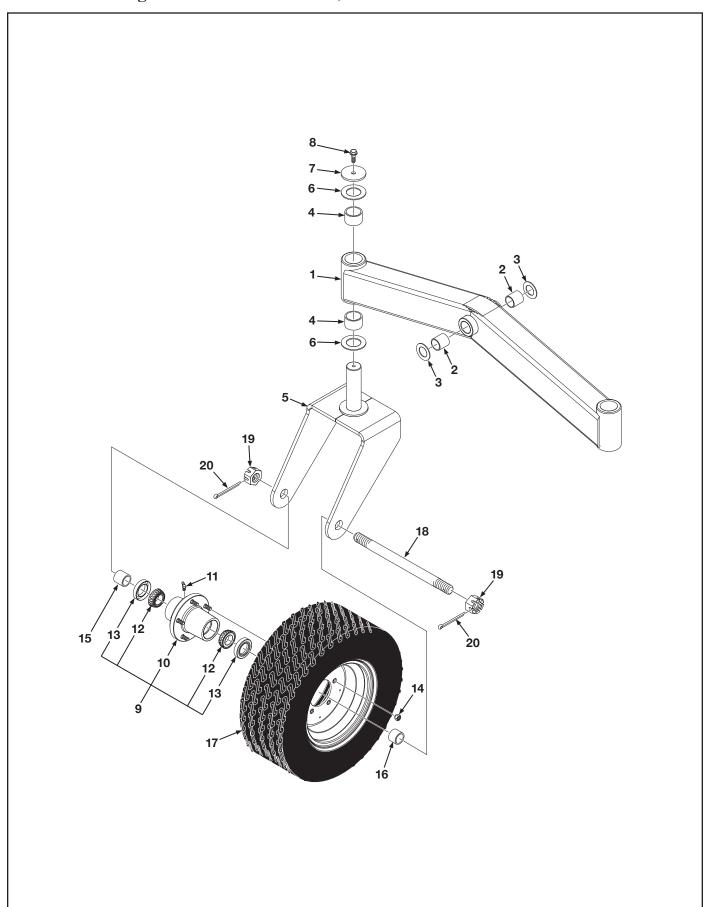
Wheel Frame, Caster Fork and Related Parts
